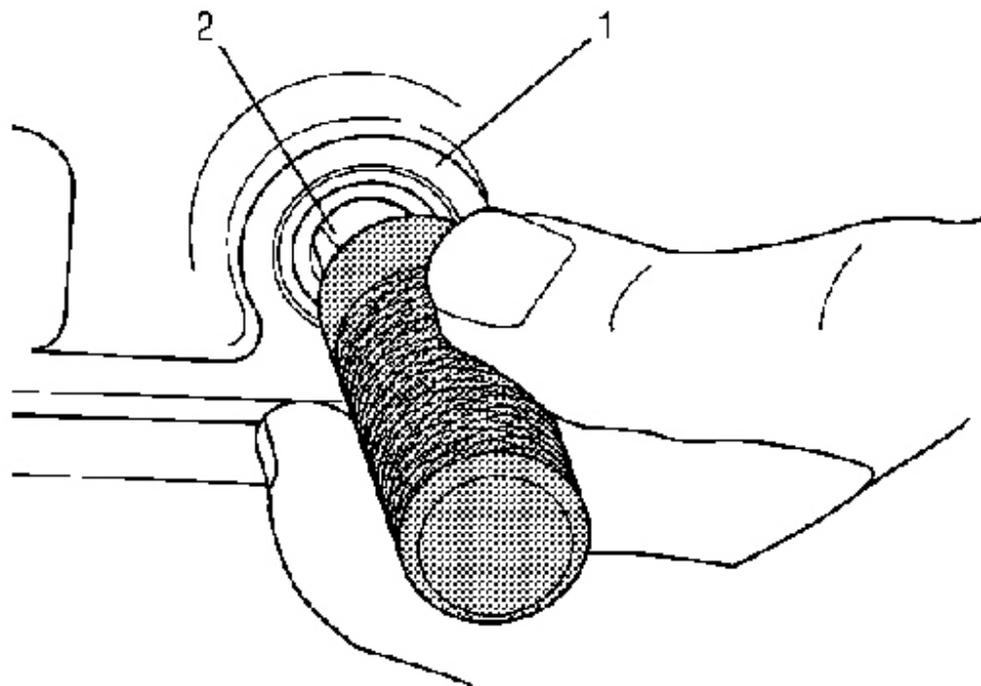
Sliding New Selector Shaft Seal Over The Selector Shaft
